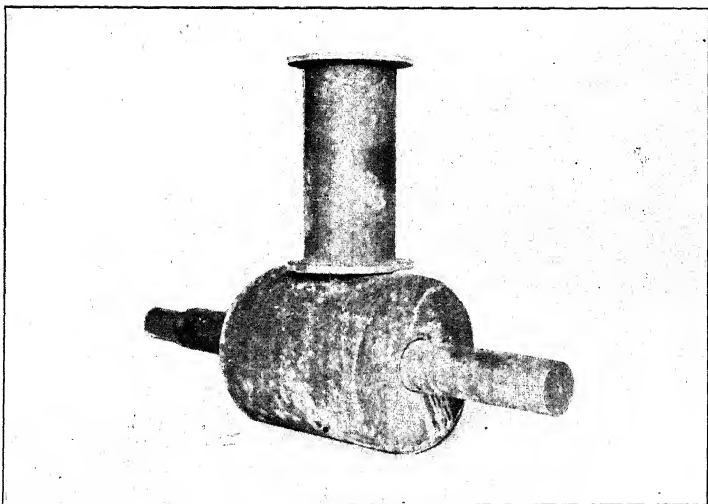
A 12- BY 14-IN. ROLL-SHELL, MOUNTED UPON ITS SHAFT, AND A FLANGED ROLL-SHELL OF THE SAME ORIGINAL SIZE WORN DOWN TO 6.75 IN. IN DIAMETER, ITS SURFACE BEING MAINTAINED CYLINDRICAL WITHOUT ANY MACHINE-WORK HAVING BEEN EXPENDED UPON IT.
